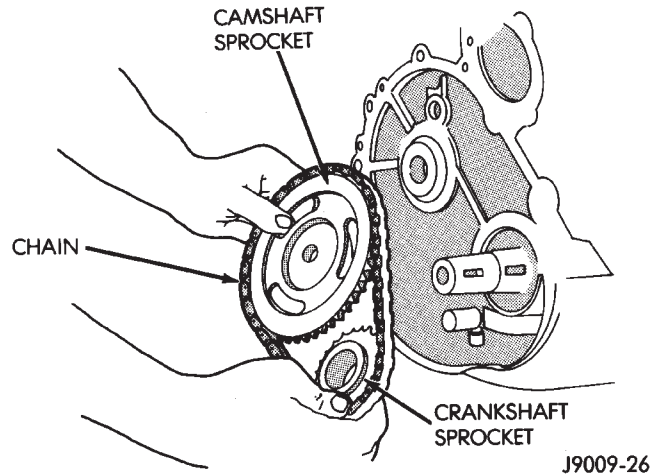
Camshaft and Crankshaft Sprockets and Chain
